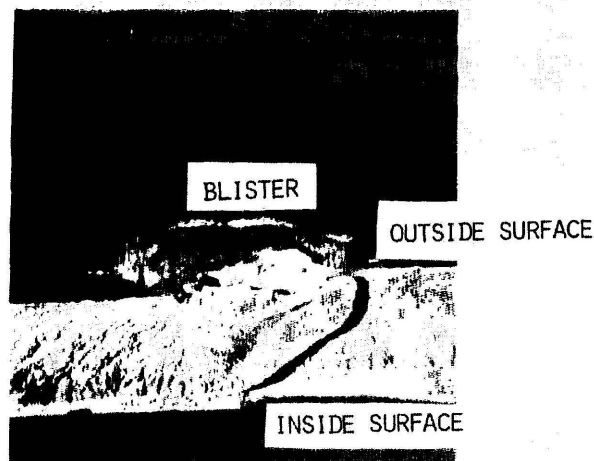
TYPICAL BLISTER AT FRACTURE SURFACE
